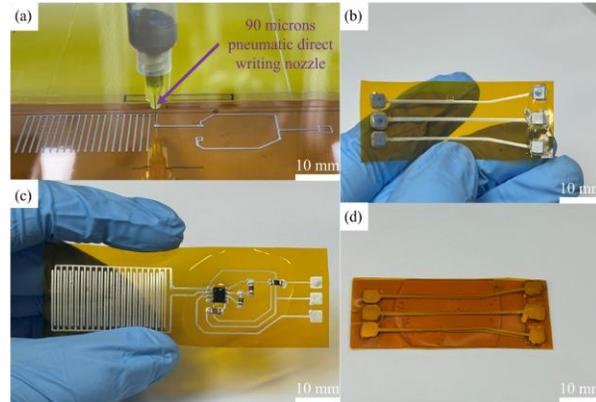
(a) Pneumatic Direct Writing Process, (b) Single Layer Plug-and-Play Modules, (c) Final Capacitive Sensing Module. (b) Single Layer Plug-and-Play Modules, (d) Double-layer Connection Plug-and-Play Module.
